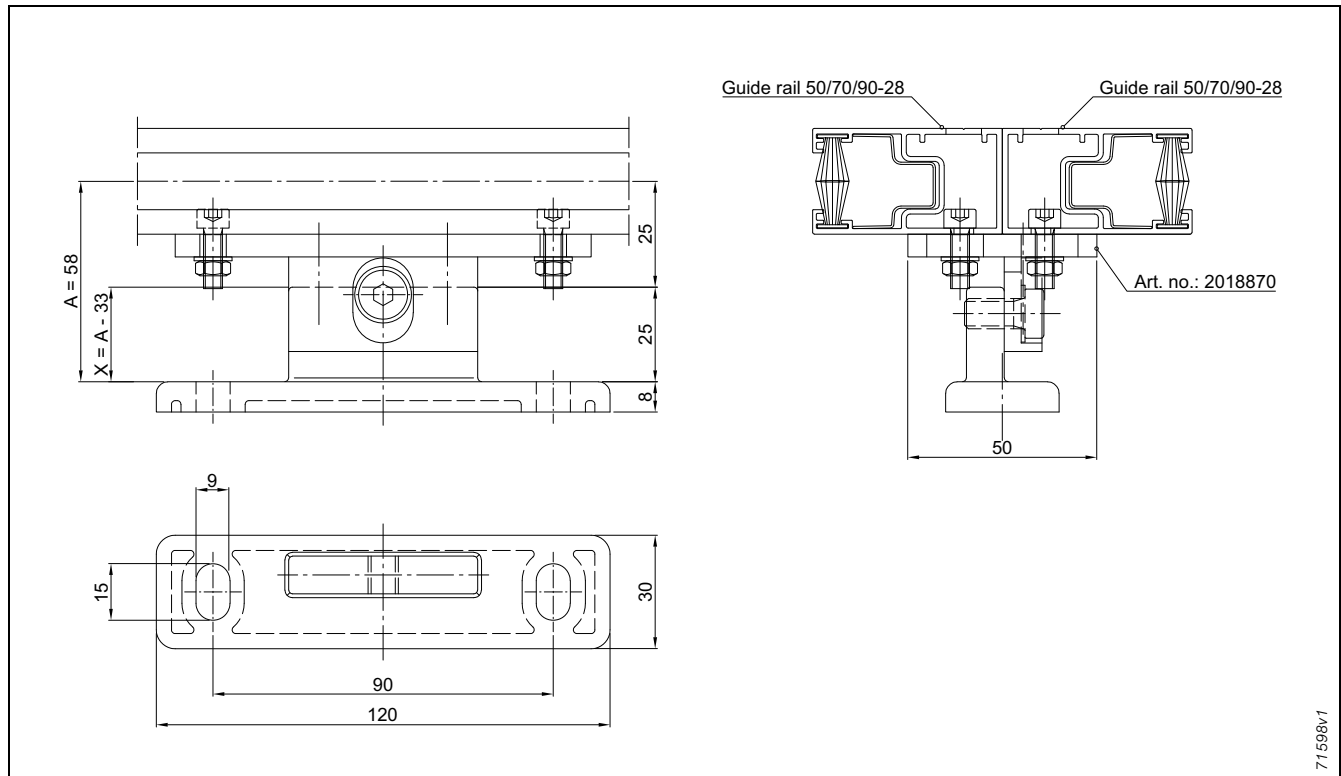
Guide rail bracket no. 9 – mounting two guide rails on one bracket
